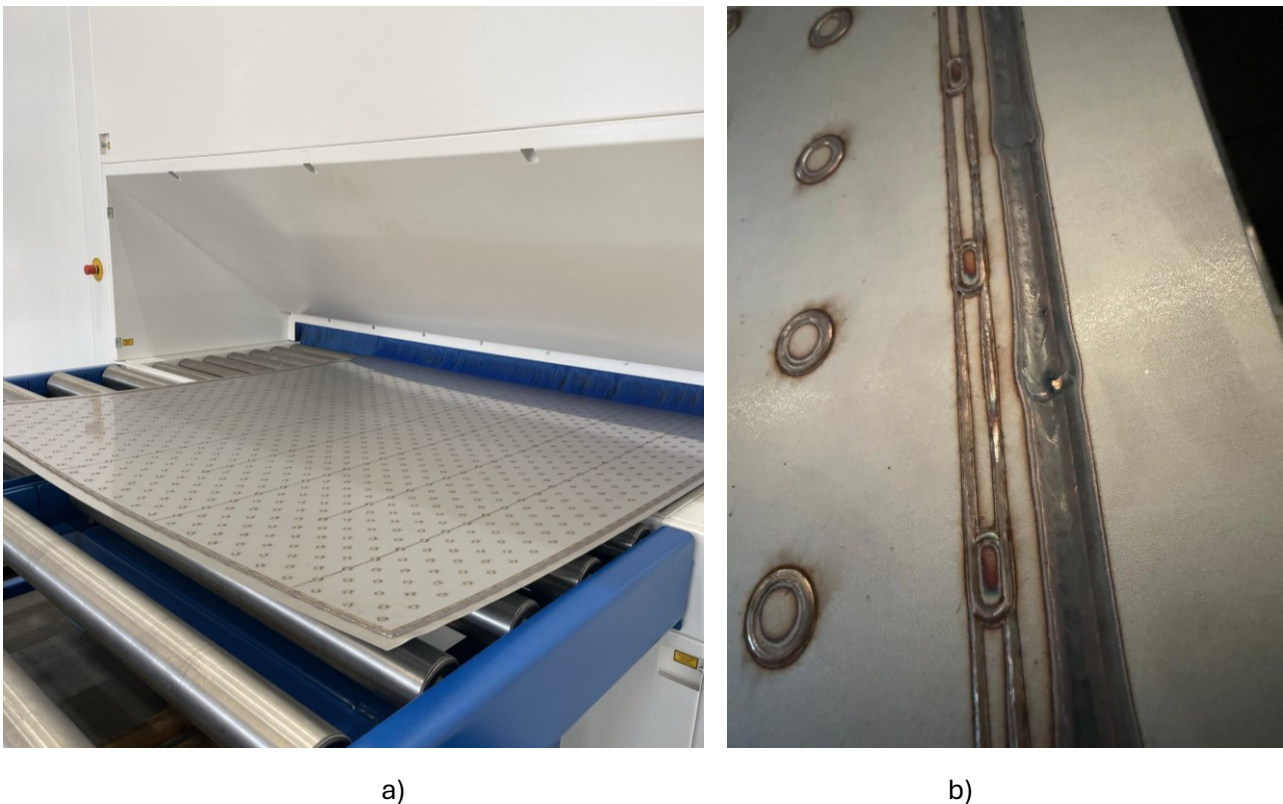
Pillow Plate after welding stage, uninflated (a). Upon close inspection the reader may see the lap-joint welding on the edge (bottom plate is slightly larger and longer), with a closely welded double seam, serpentines and welding spots in a longitudinal triangular pattern. On the right (b), from the left: welding spots, seam weld, lap-joint, slightly burnt due to ongoing welding parameter optimization
